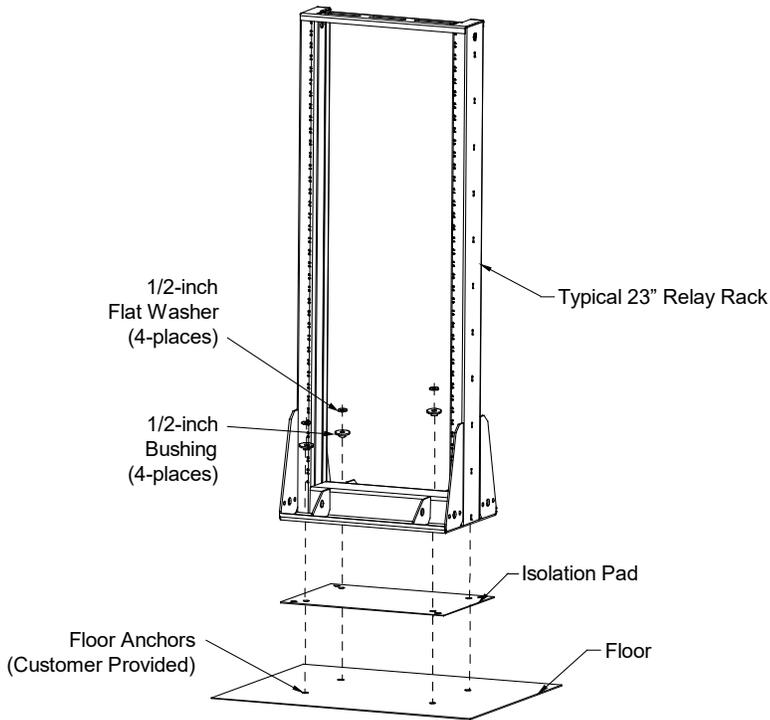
Relay Rack Floor Mounting Dimensions
